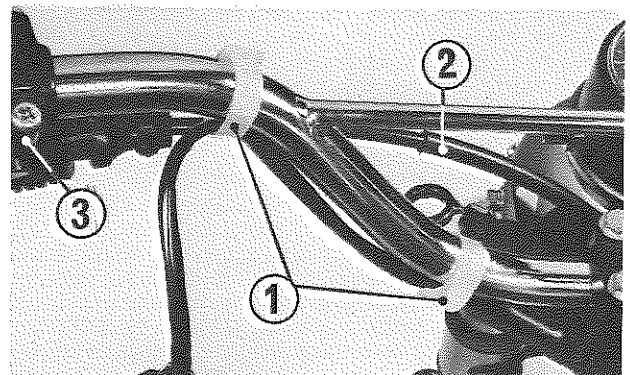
(1) Wire bands (2) Clutch cable (3) Handlebar bracket
